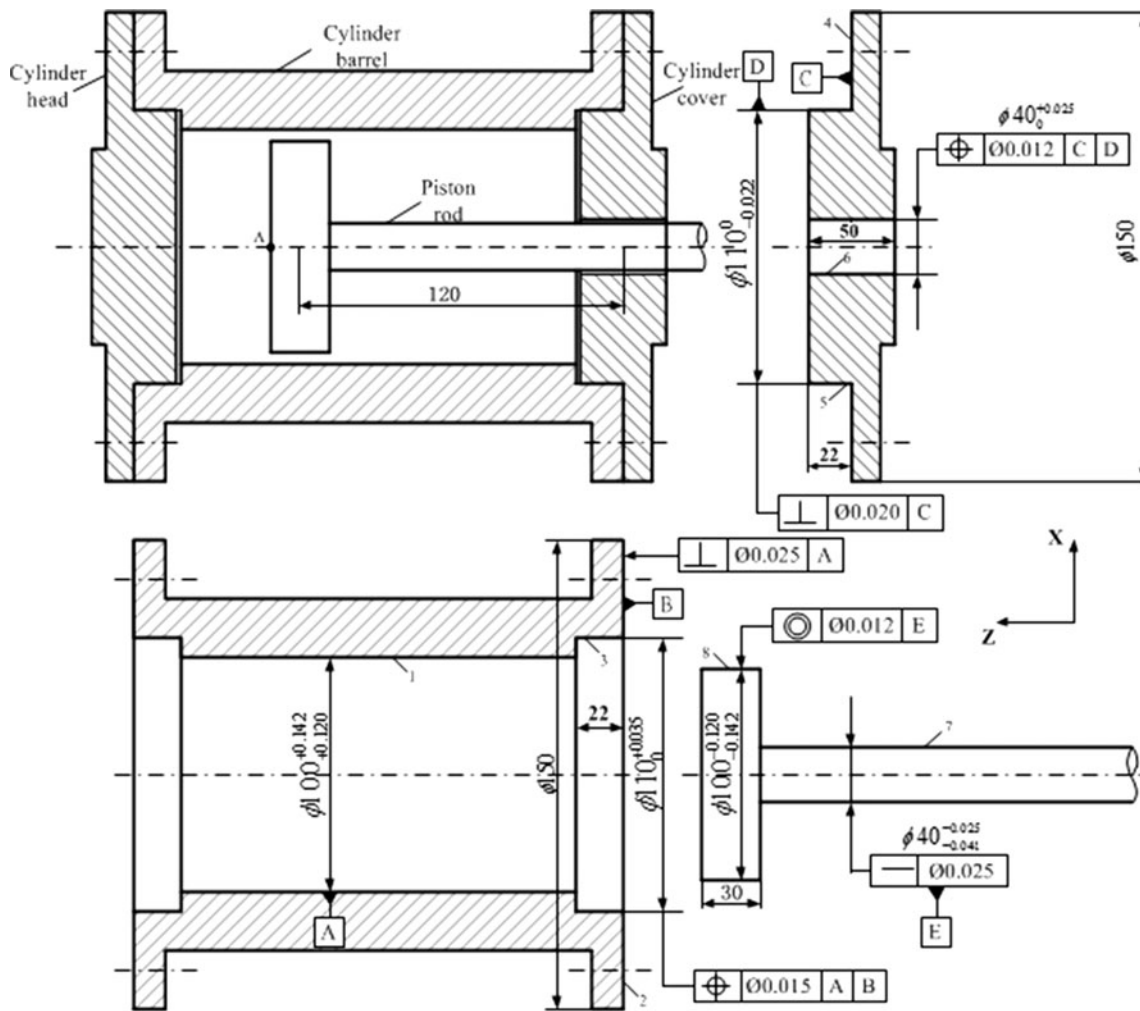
The design of a single-rod piston cylinder, showing the tolerances
